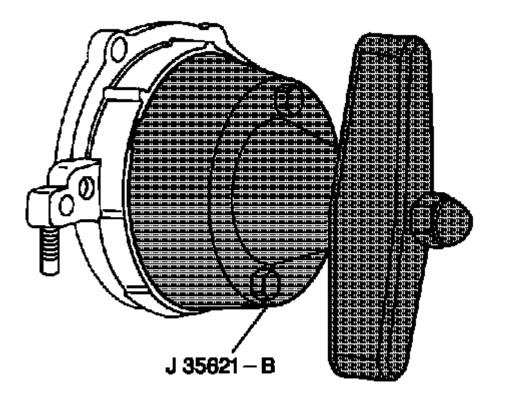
Installing The Crankshaft Rear Oil Seal Using J 35621-B Courtesy of GENERAL MOTORS CORP.
